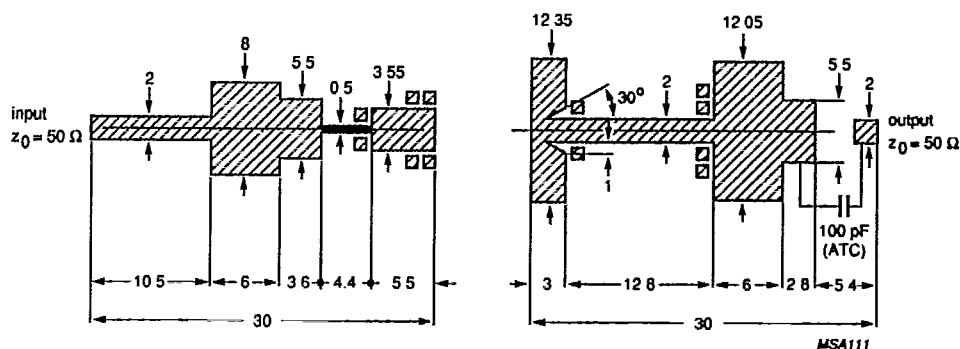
Prematching test circuit board for 4.2 GHz. (Dimensions in mm).
